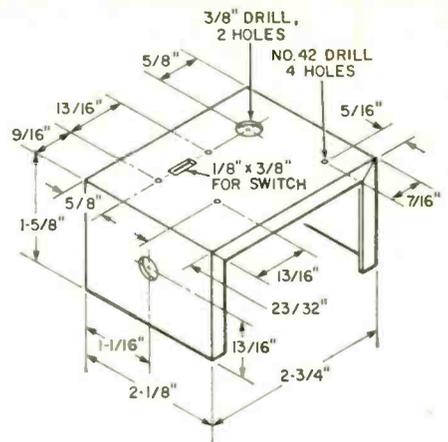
THE MINIATURE CASE is drilled or punched to the dimensions shown.
